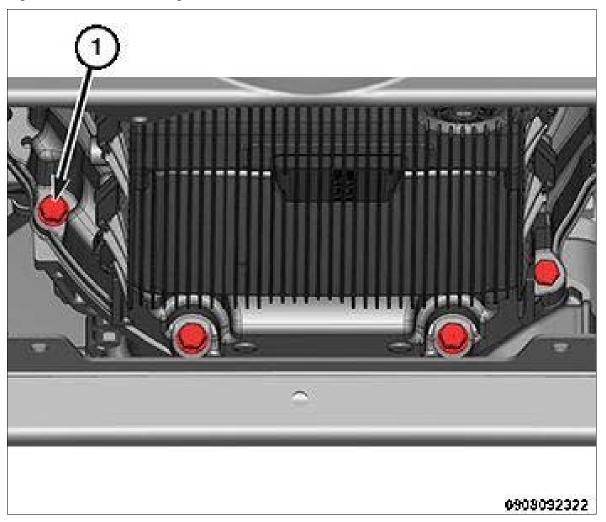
Rubber Plugs Covering Rear Oil Seal Retainer Flange Bolts
